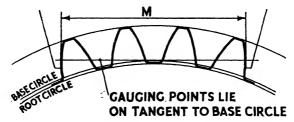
GEAR TOOTH TESTER (PRINCIPLE)
